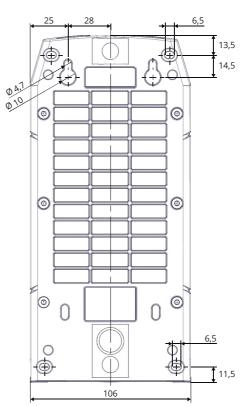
BL-EPS-1005 (top, bottom), dimensions in millimeter
